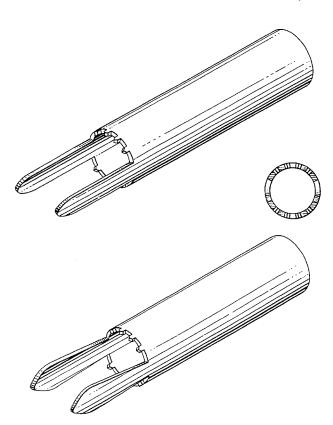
is a right side perspective view of a third embodiment of the design of FIG. 1, with the left side perspective view being a mirror image thereof;
